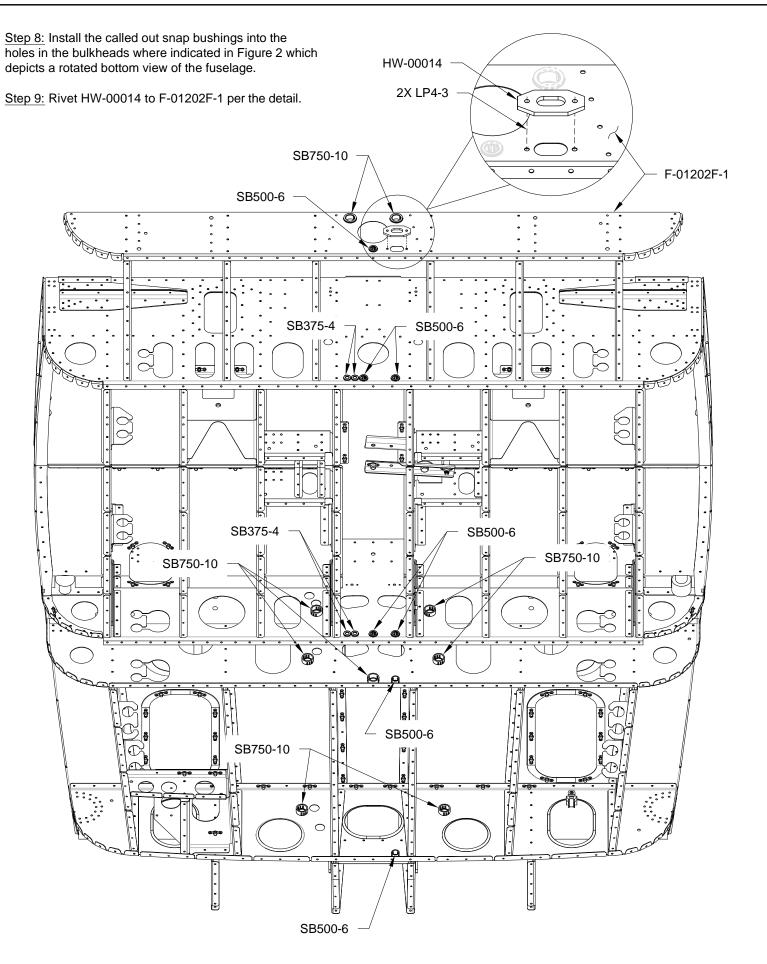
RIVETING STEP RIBS AND F-01202F-1
